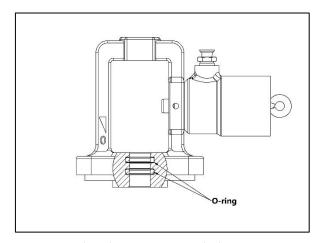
Replace the two O-rings inside the bonnet. Use suitable tool to reach the O-rings if needed.
